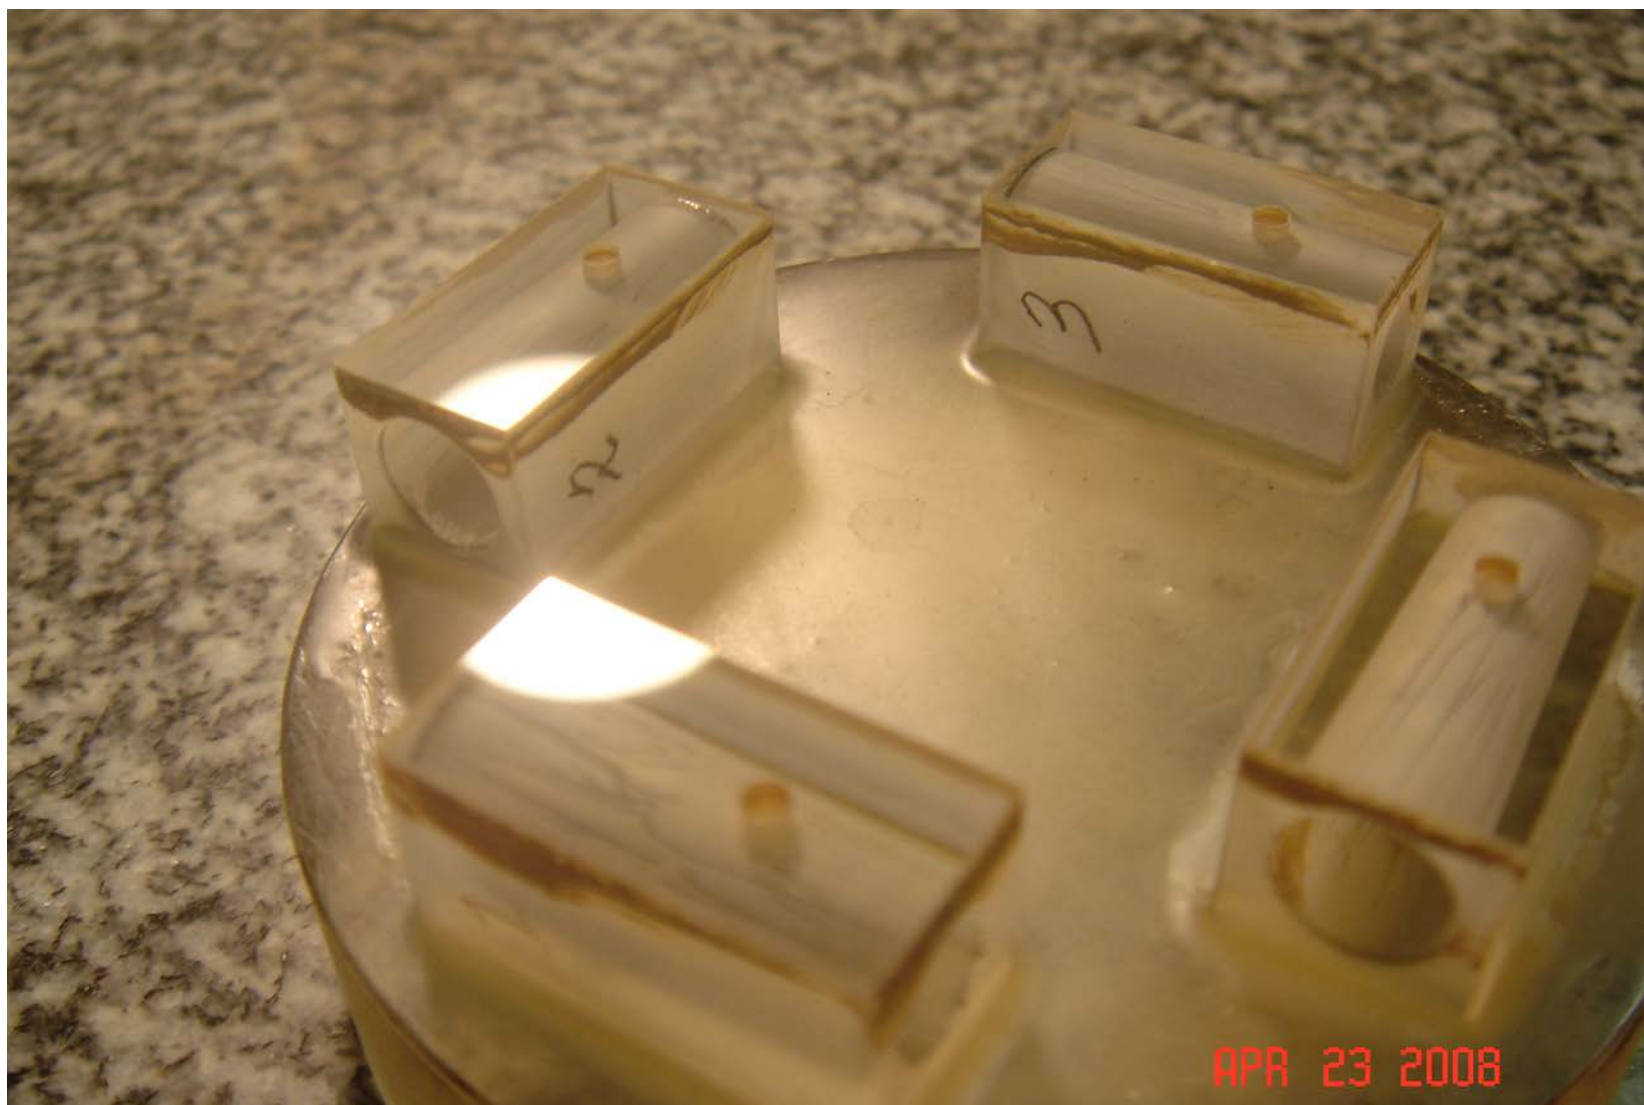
Polishing stopcock barrel faces. Four barrels are mounted to a grinding disc using a mixture of optical rosin and bees wax. Surfaces are ground to an optical finish. All sides are done similarly.
